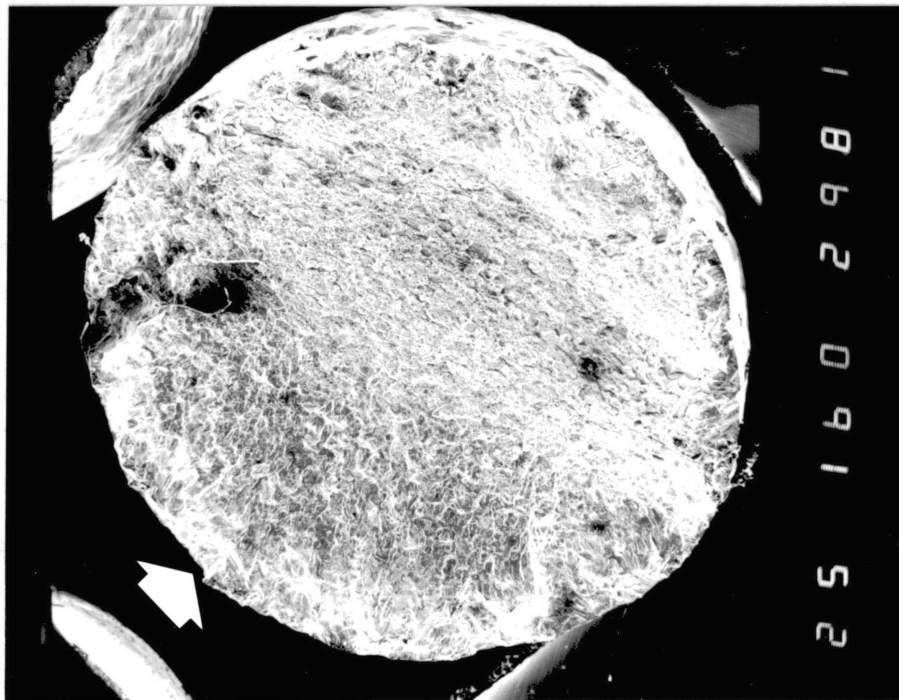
Fracture Surface of Inconel 600 Fatigued in Hydrogen
